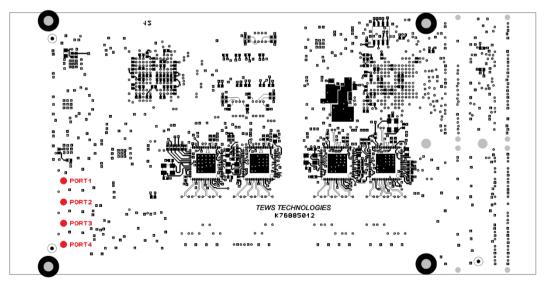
LEDs and markings (TPMC885-x1R bottom view)
